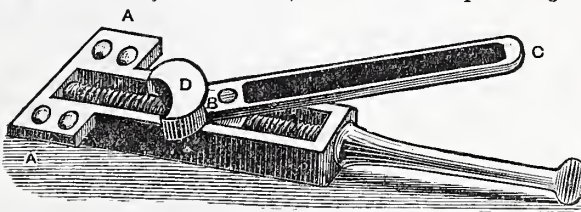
Nurse's Regulator for Adjusting Plane Irons.
